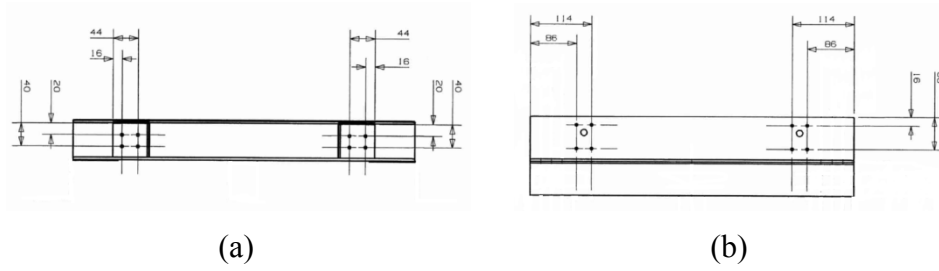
(a) Side view and (b) top view of spot welds location of main support structures
